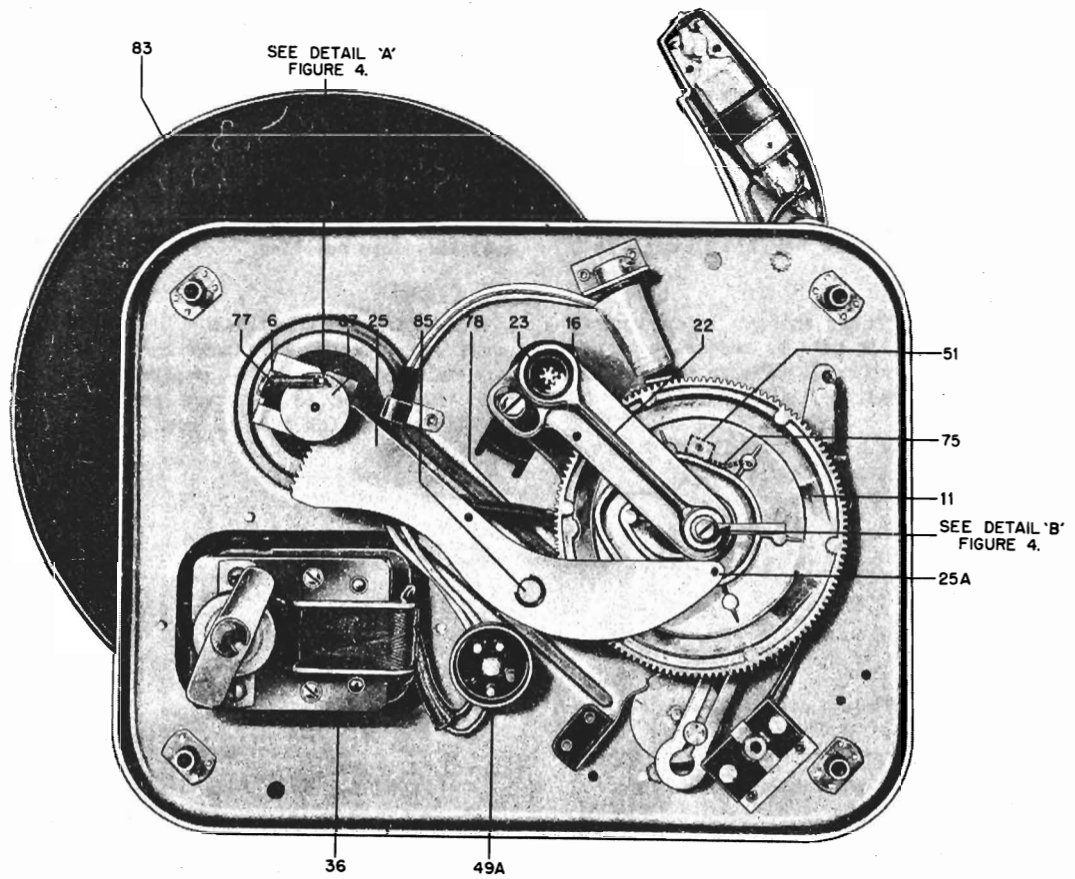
PARTS LOCATION - BOTTOM - COMPLETE
